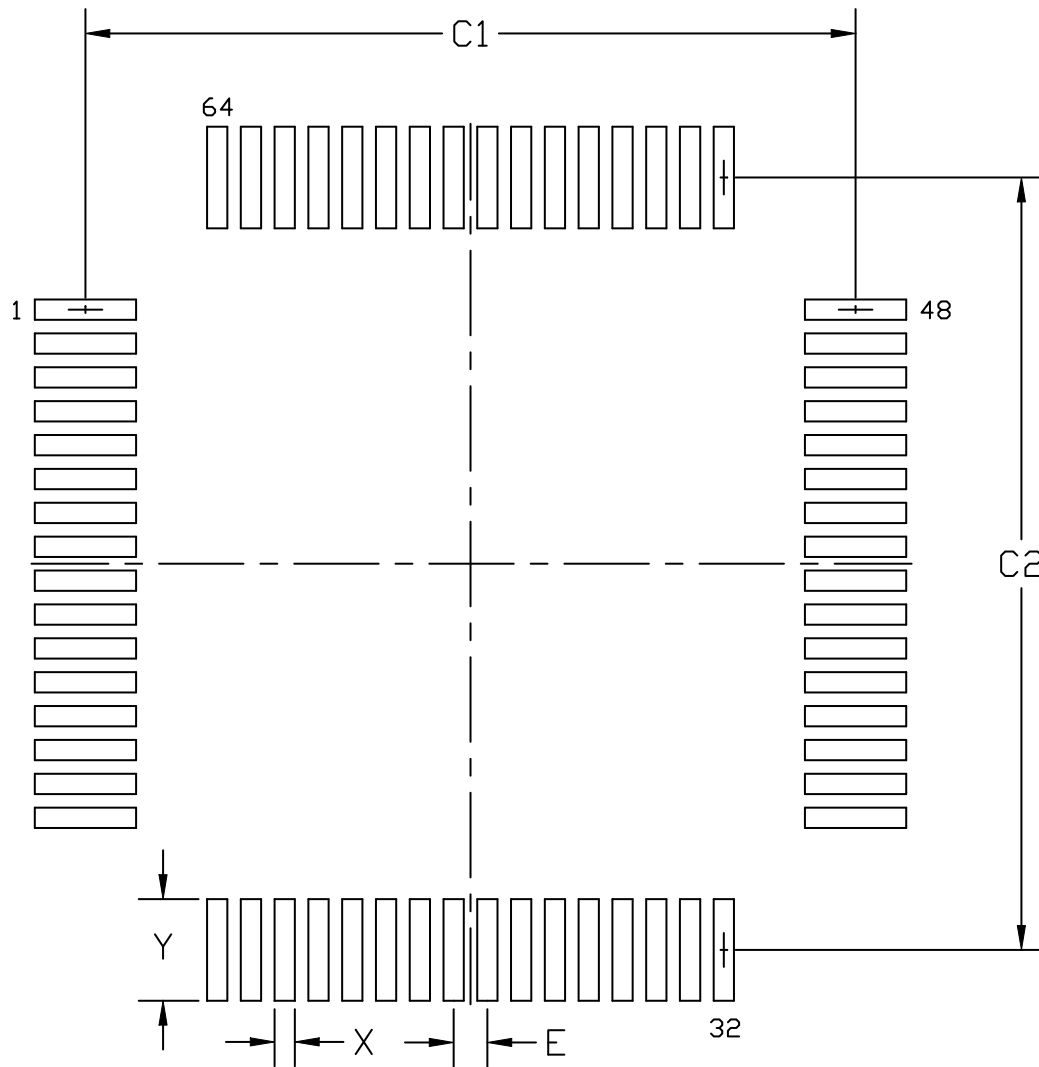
TQFP64 PCB Land Pattern Drawing
